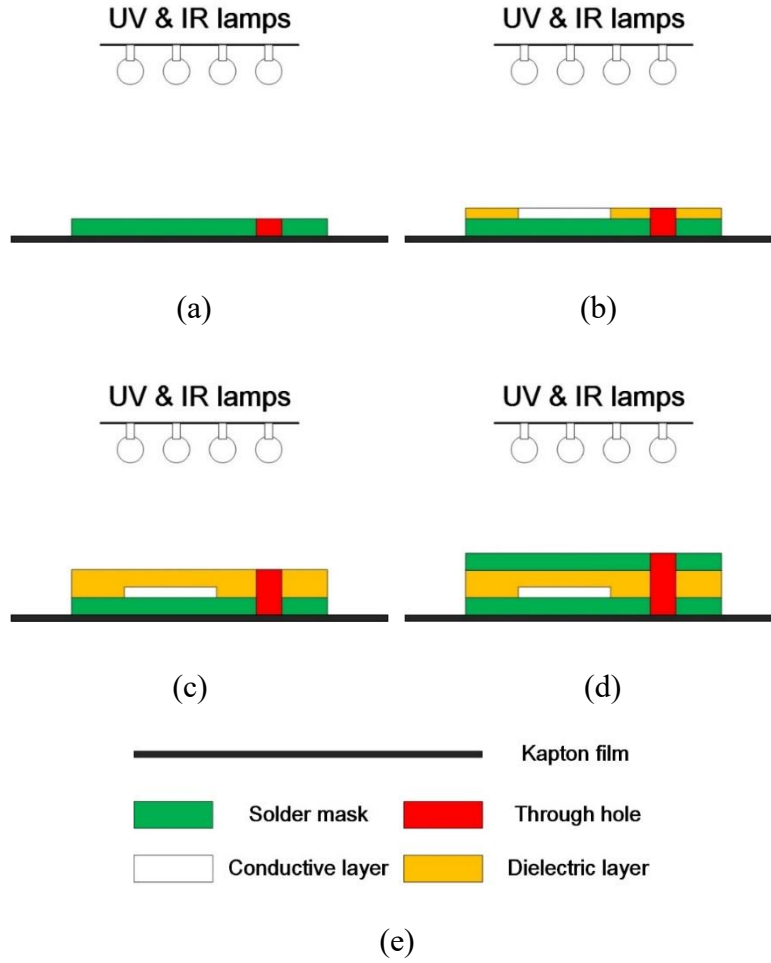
Fabrication process of the applied multimaterial 3D printing. (a) Step 1 – Print the bottom solder mask layer. (b) Step 2 – Print dielectric, conductive patterns and through holes (if any). (c) Step 3 – Print 3D patterns. (d) Step 4 – Print the top solder mask layer for finishing. (e) Graphic symbol.
